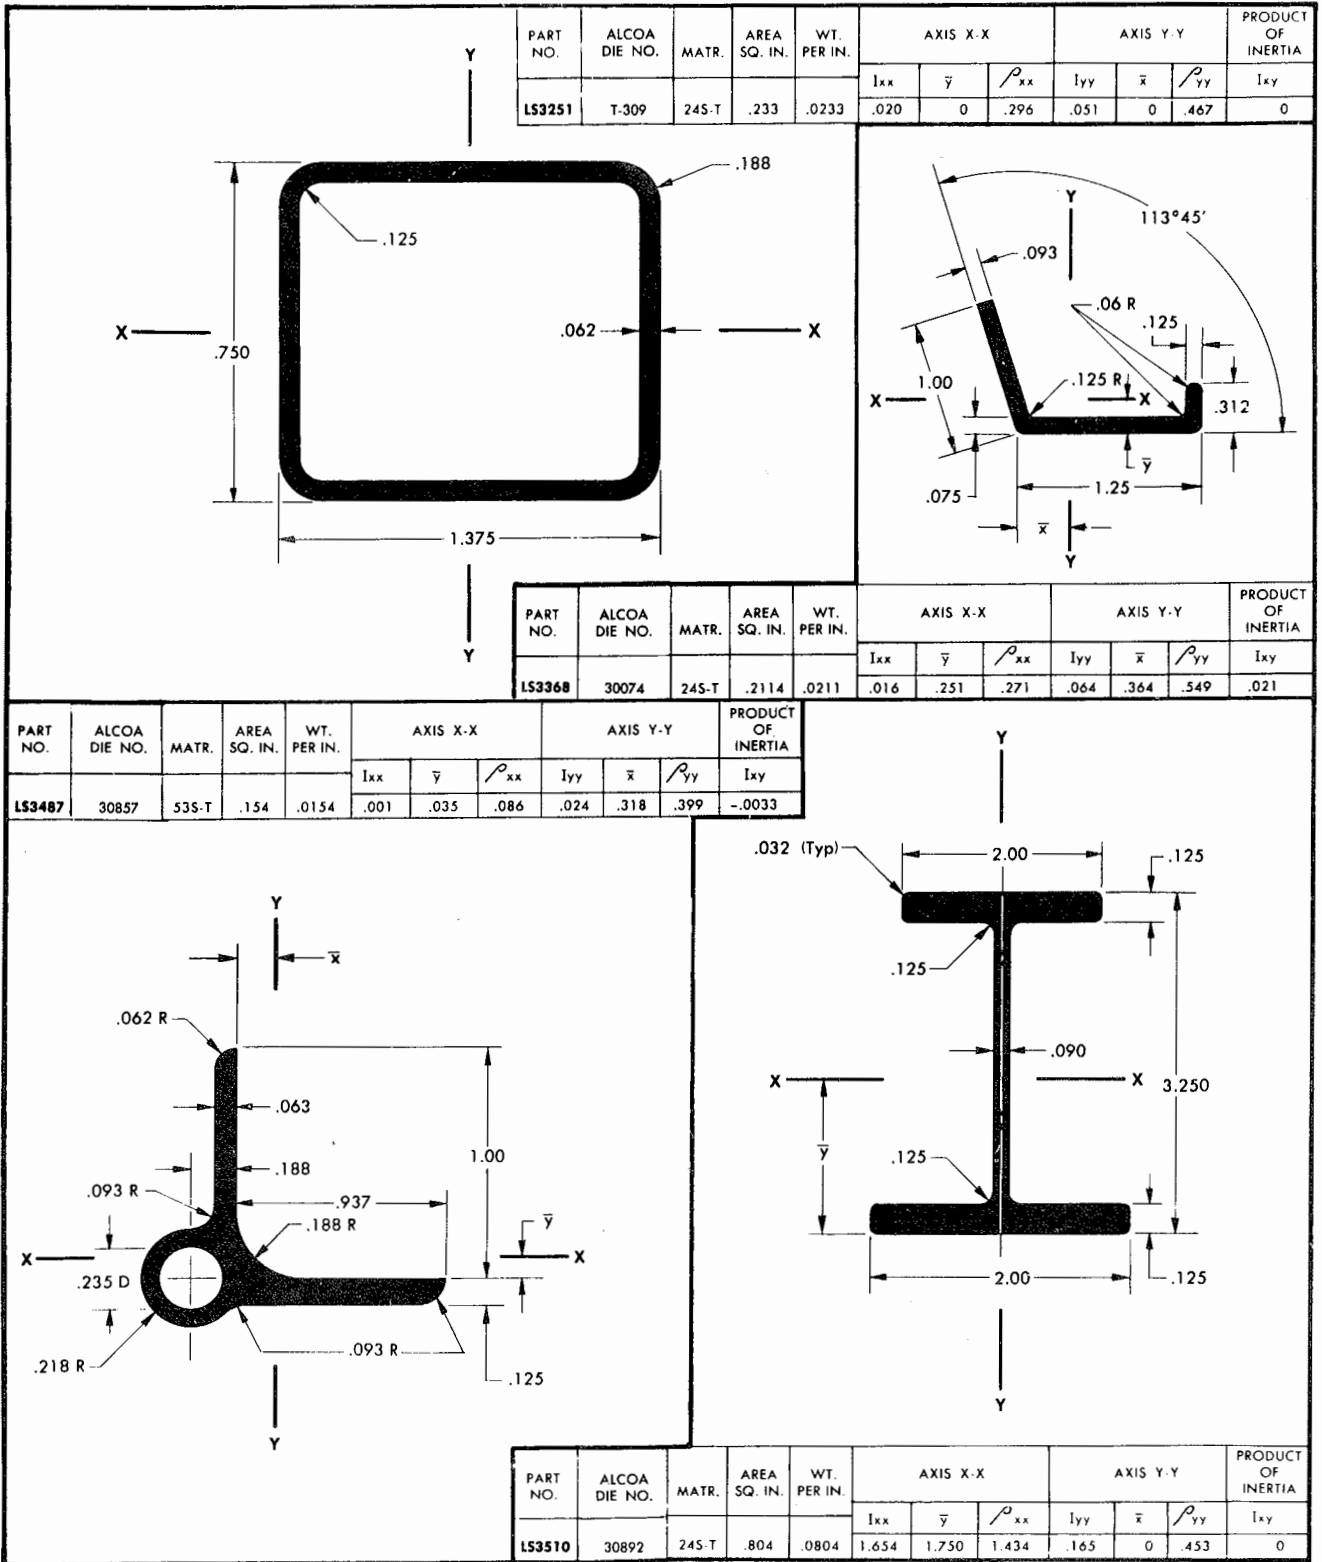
(Sheet 10 of 17 Sheets) — Extruded Standards
